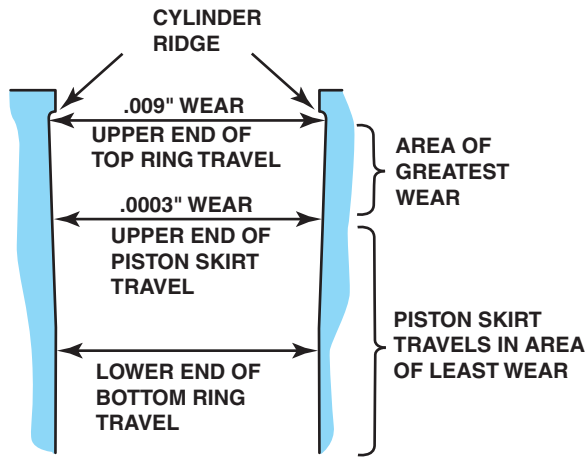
Most of the cylinder wear is on the top inch just below the cylinder ridge. This wear is due to the heat and combustion pressures that occur when the piston is near the top of the cylinder.
